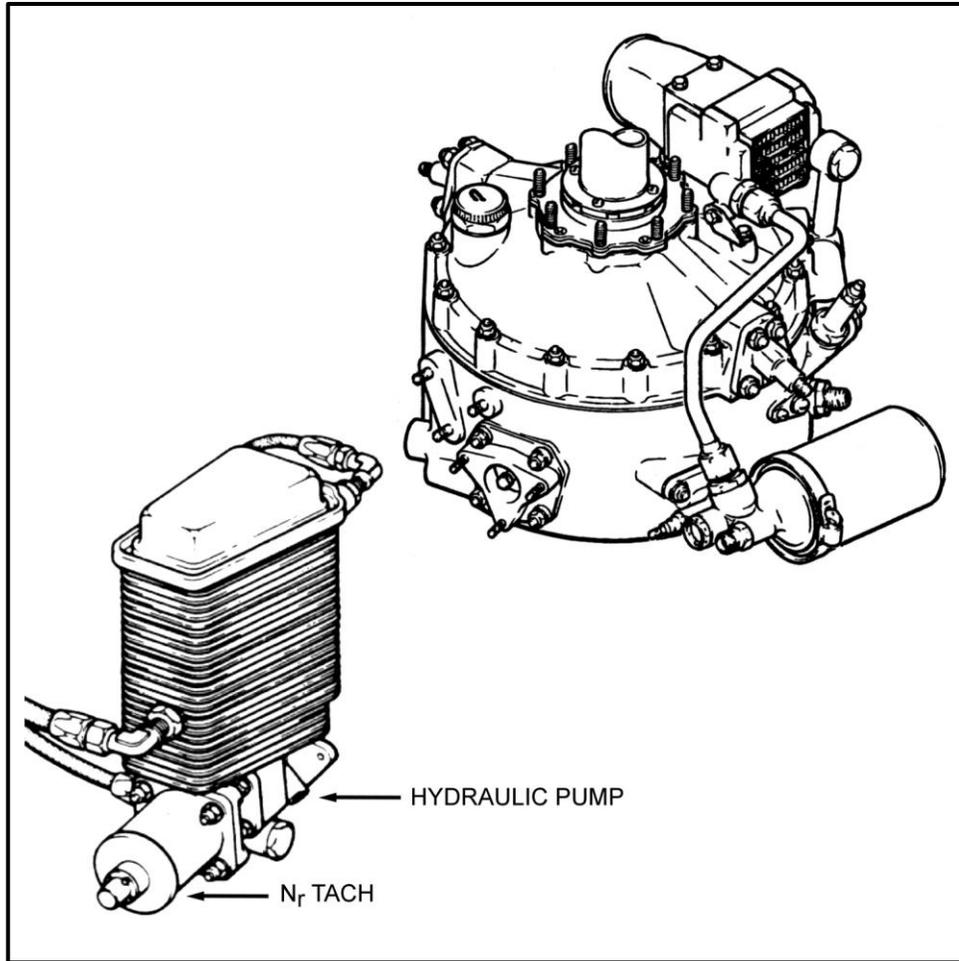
Hydraulic Pump and N_r Tach Generator Mounting
